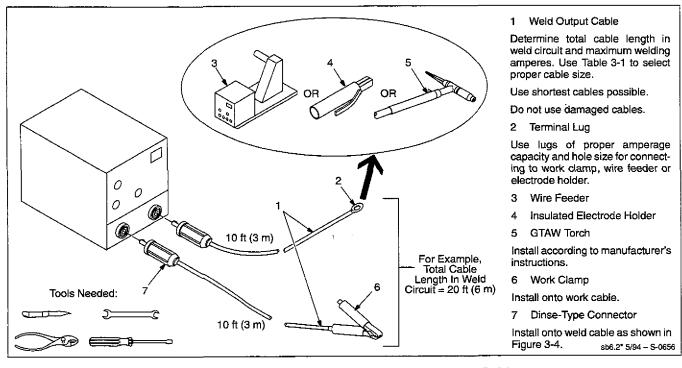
Selecting And Preparing Weld Output Cables
